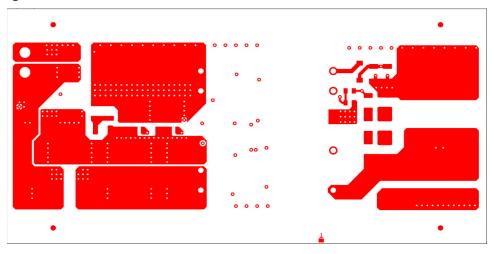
RDR-85SLR Top Layer PCB Layout.
